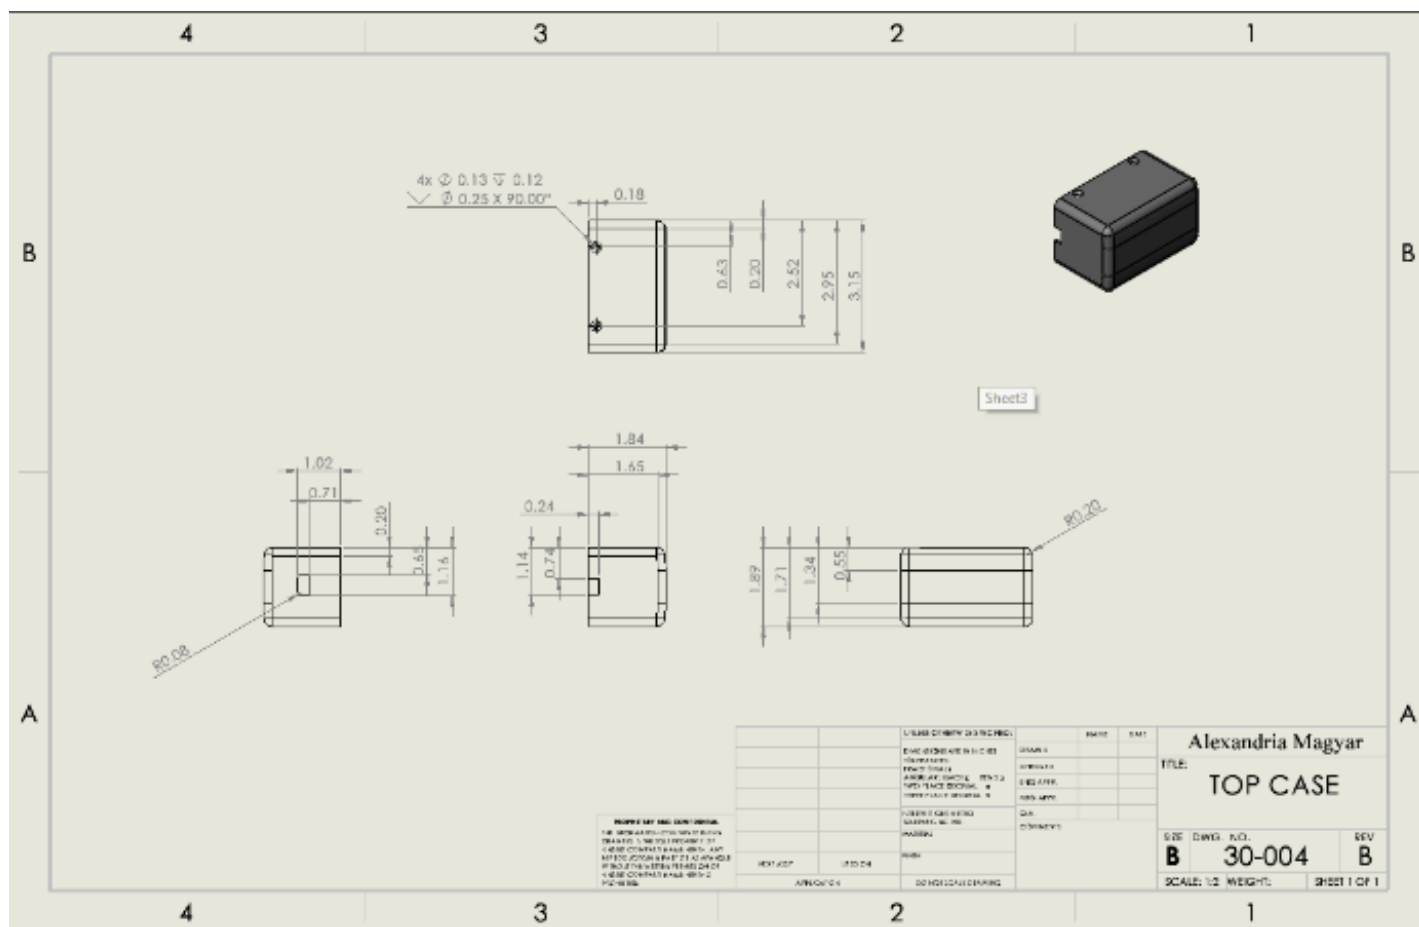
SolidWorks Drawing of Layer Board 1 Case Component
